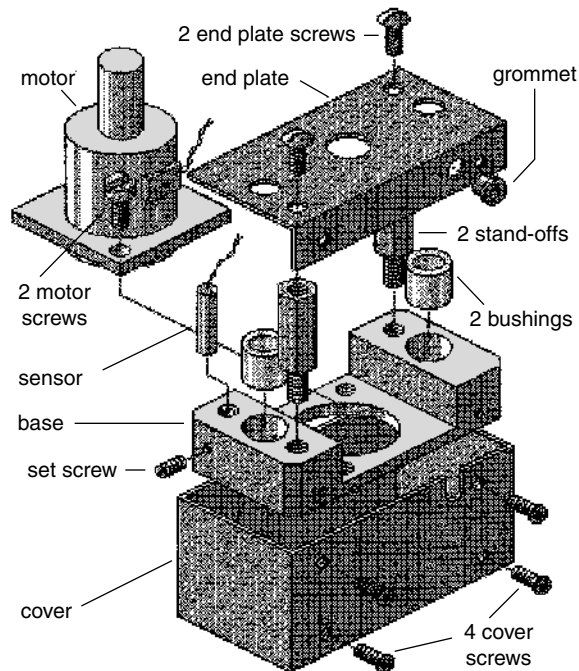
Proposed motor drive assembly. (From Ref. 1.)
